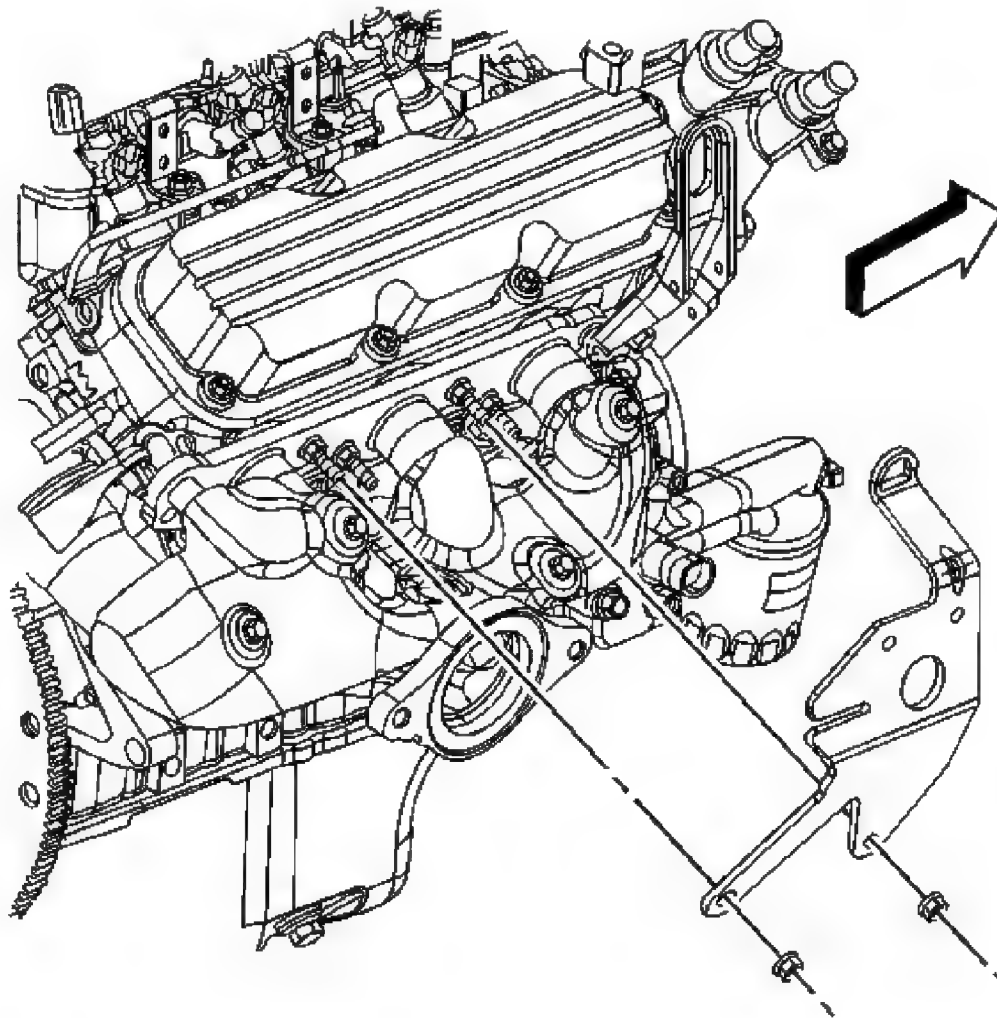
Identifying Sight Shield Bracket Nuts & Bracket
